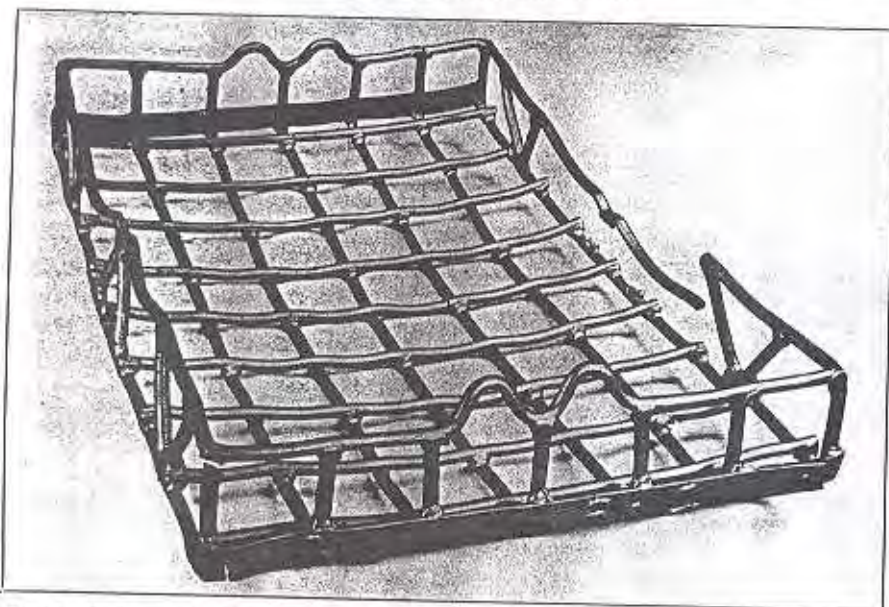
How a basket looked after nine months of carbonitriding, carburizing, and plain hardening in a job shop. Floor was originally pressure welded without filler. In making repairs, filler metal was added. Damage included distortion, weld failures, breakage.
